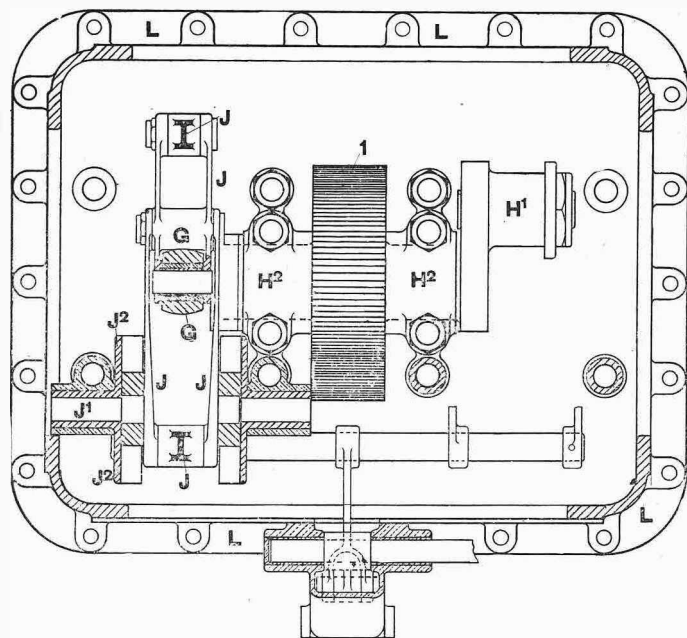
Transverse section of engine, showing crank on right and Joy gear on left.
